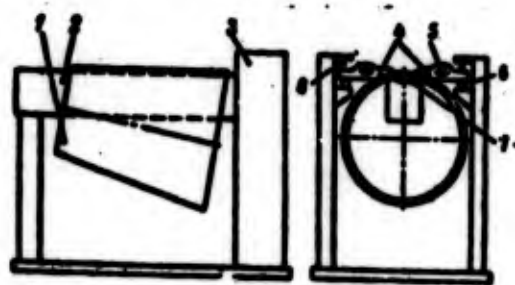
Device for the welding of longitudinal seams: 1 - part to be welded; 2 - cantilever; 3 - stand; 4 - clamp paws; 5 - axis; 6 - rubber hose; 7 - lining; 8 - spring.
